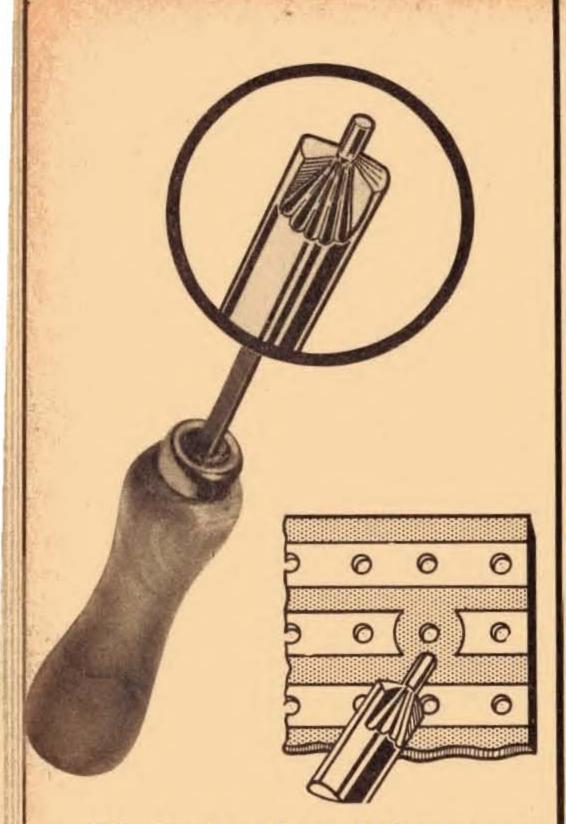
General view of the tool with an enlargement showing the details of the cutting edges. The inset drawing shows the effect of using the tool on the copper strip
